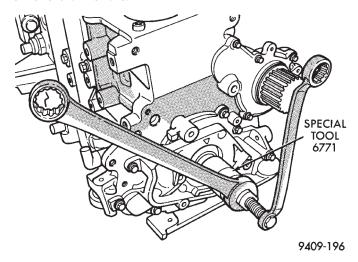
Front Crankshaft Oil Seal—Removal INSTALLATION
